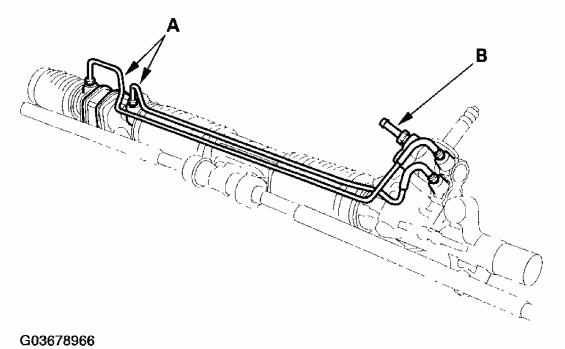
Identifying Cylinder Lines And Return Line Joint
